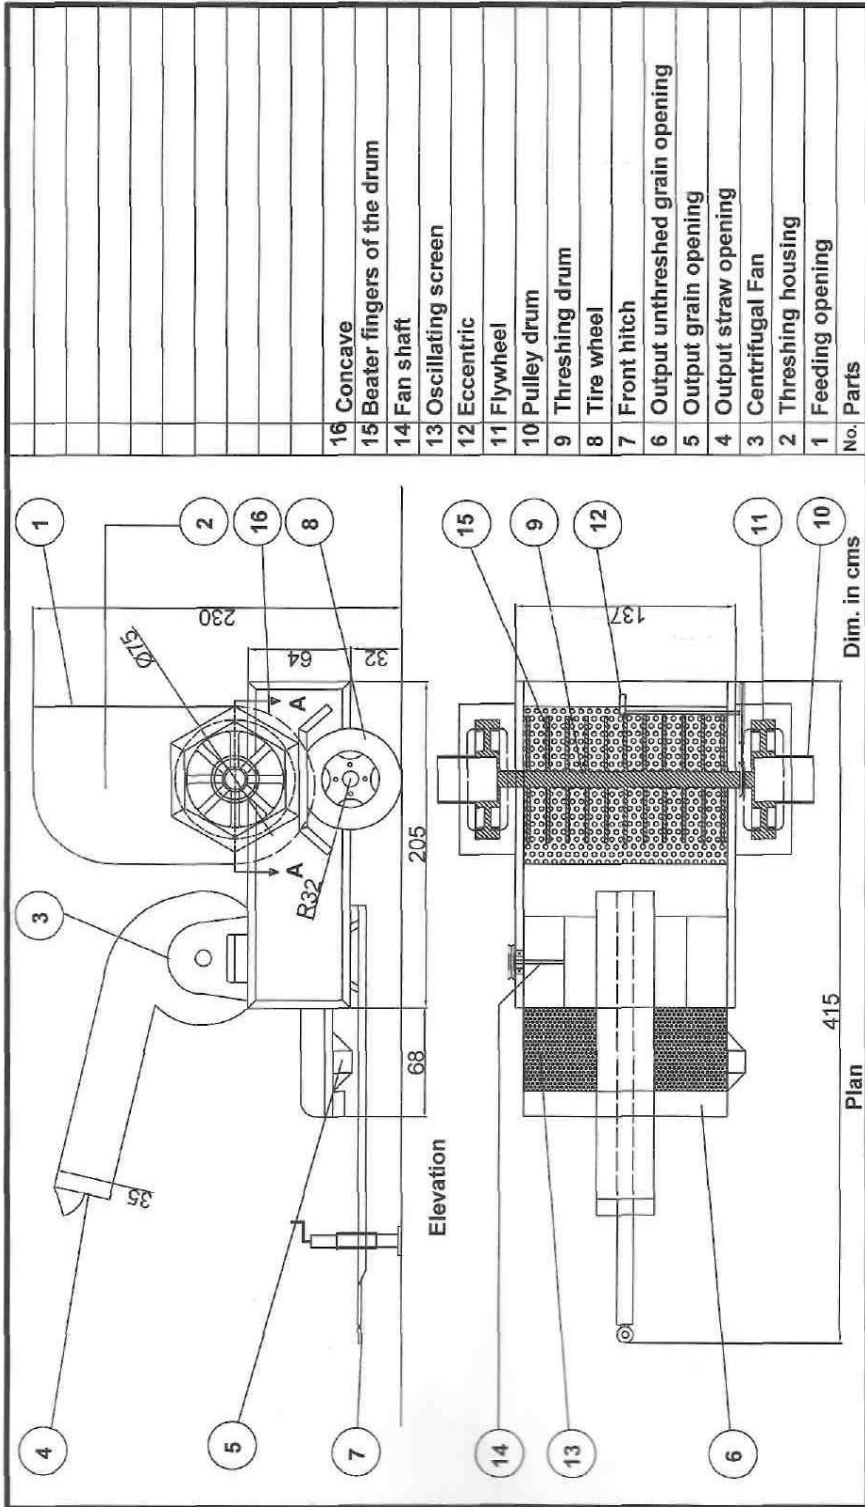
Main components of threshing machine (Cetinel 120) before modification
